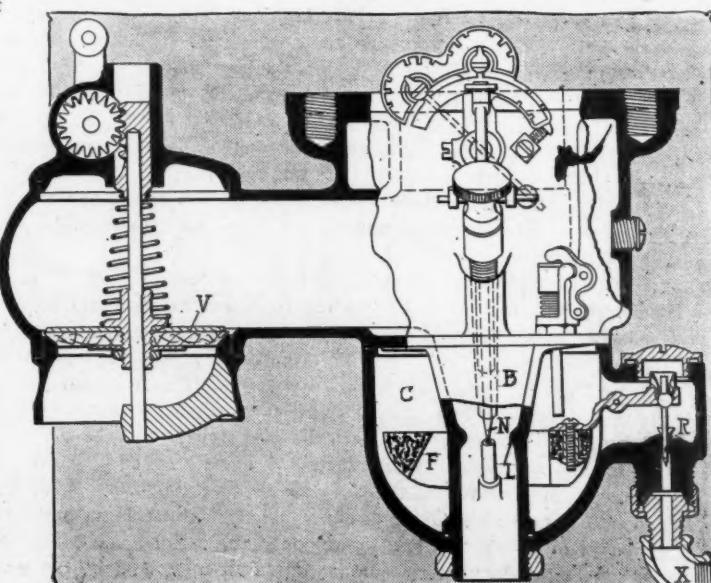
Schebler L has concentric float and spring auxiliary valve
